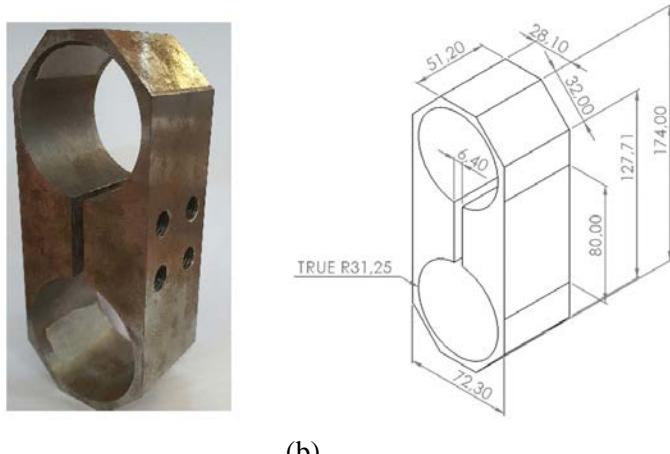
Picture of a) octagonal ring and b) dimensions (mm)
